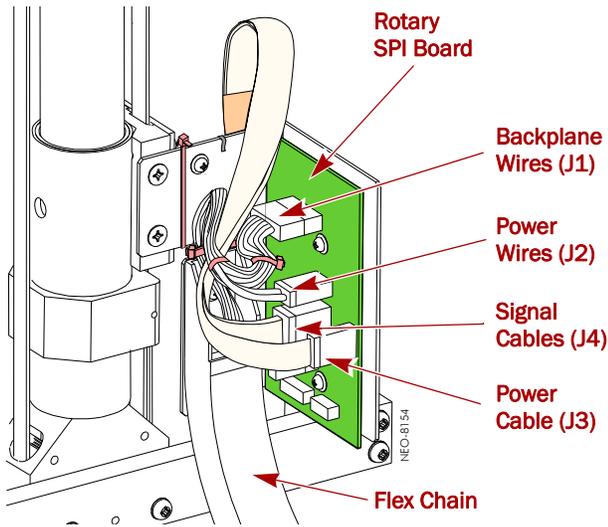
Rotary SPI Board in Rear Z-Axis Assembly (Rear View)
